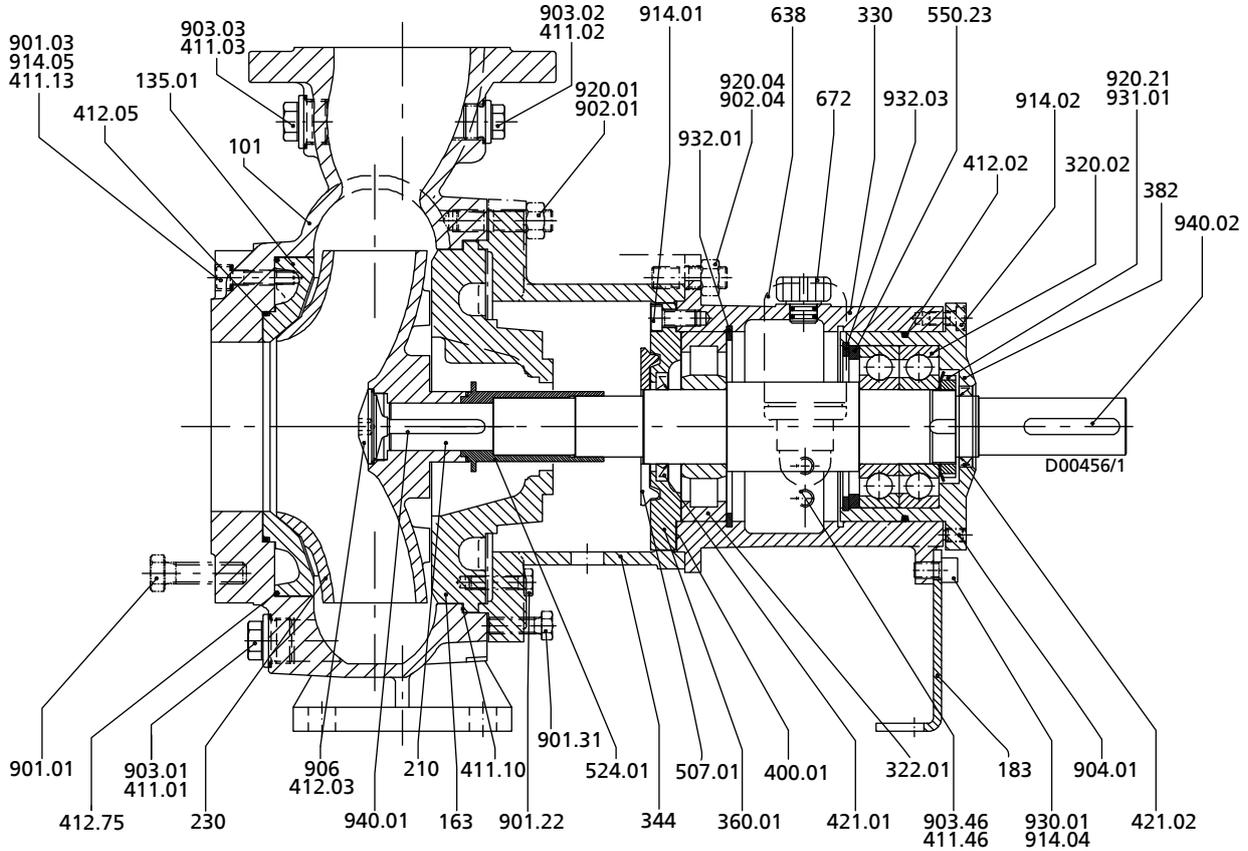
General assembly drawing of pump with bearing bracket P03ax to P06x
